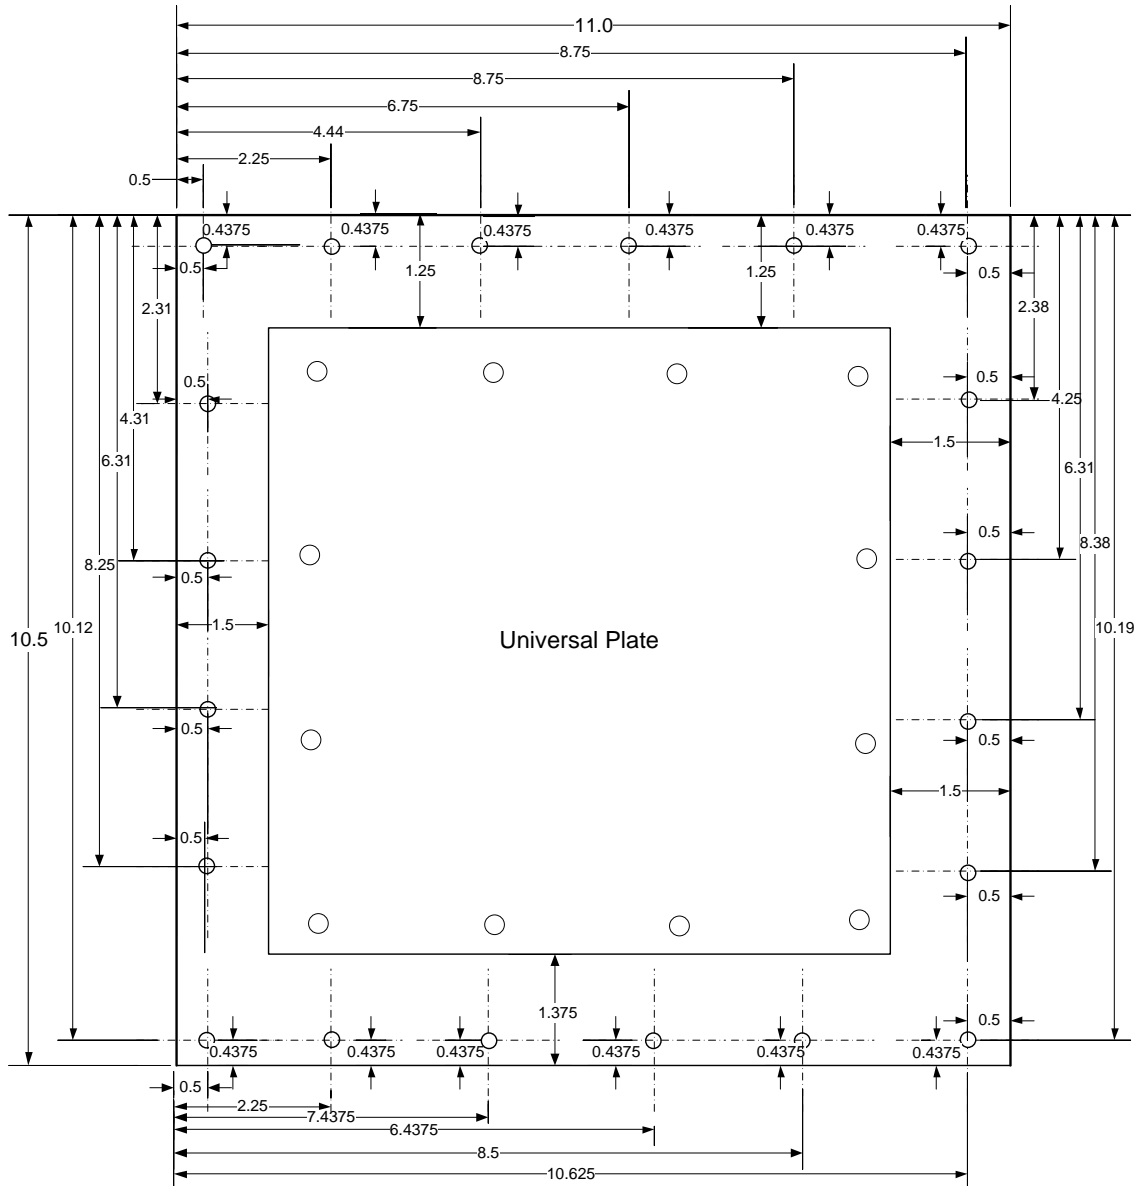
Waveguide Mounting Plate #1 w/ Universal plate and Two 2 inch copper tubes (between R23M & R23L)
